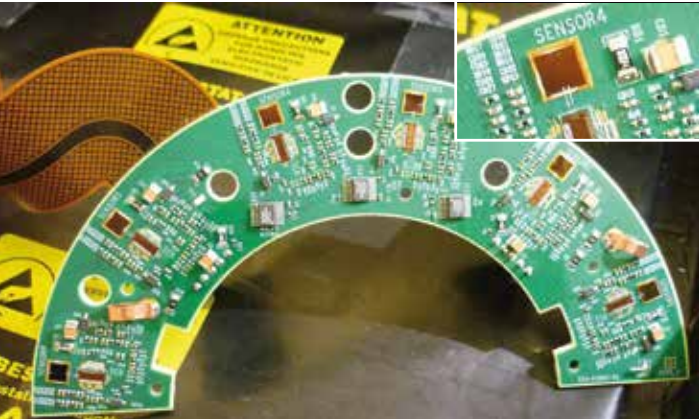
Left: Fully assembled BCM1F half-ring with sensors and front-end ASICs. Right: Zoom showing one two-pad diamond sensor bonded to the front-end ASIC.
